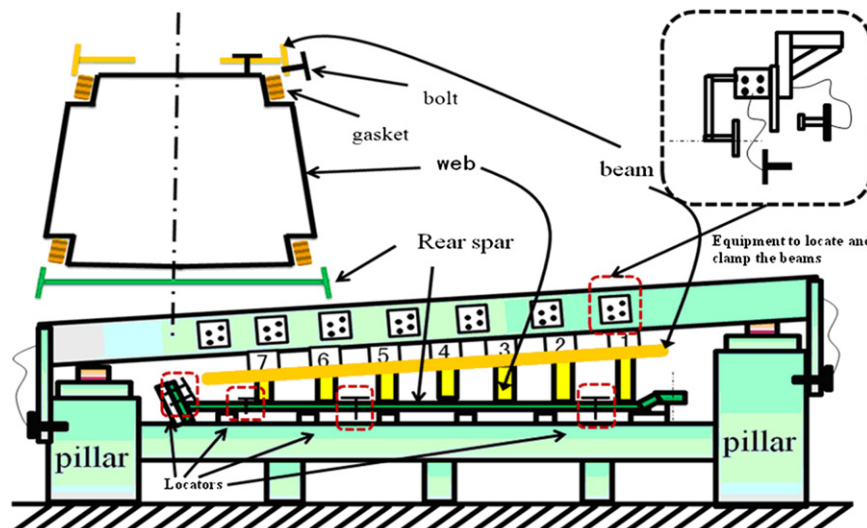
Fixture scheme in aircraft horizontal stabilizer assembly process.
